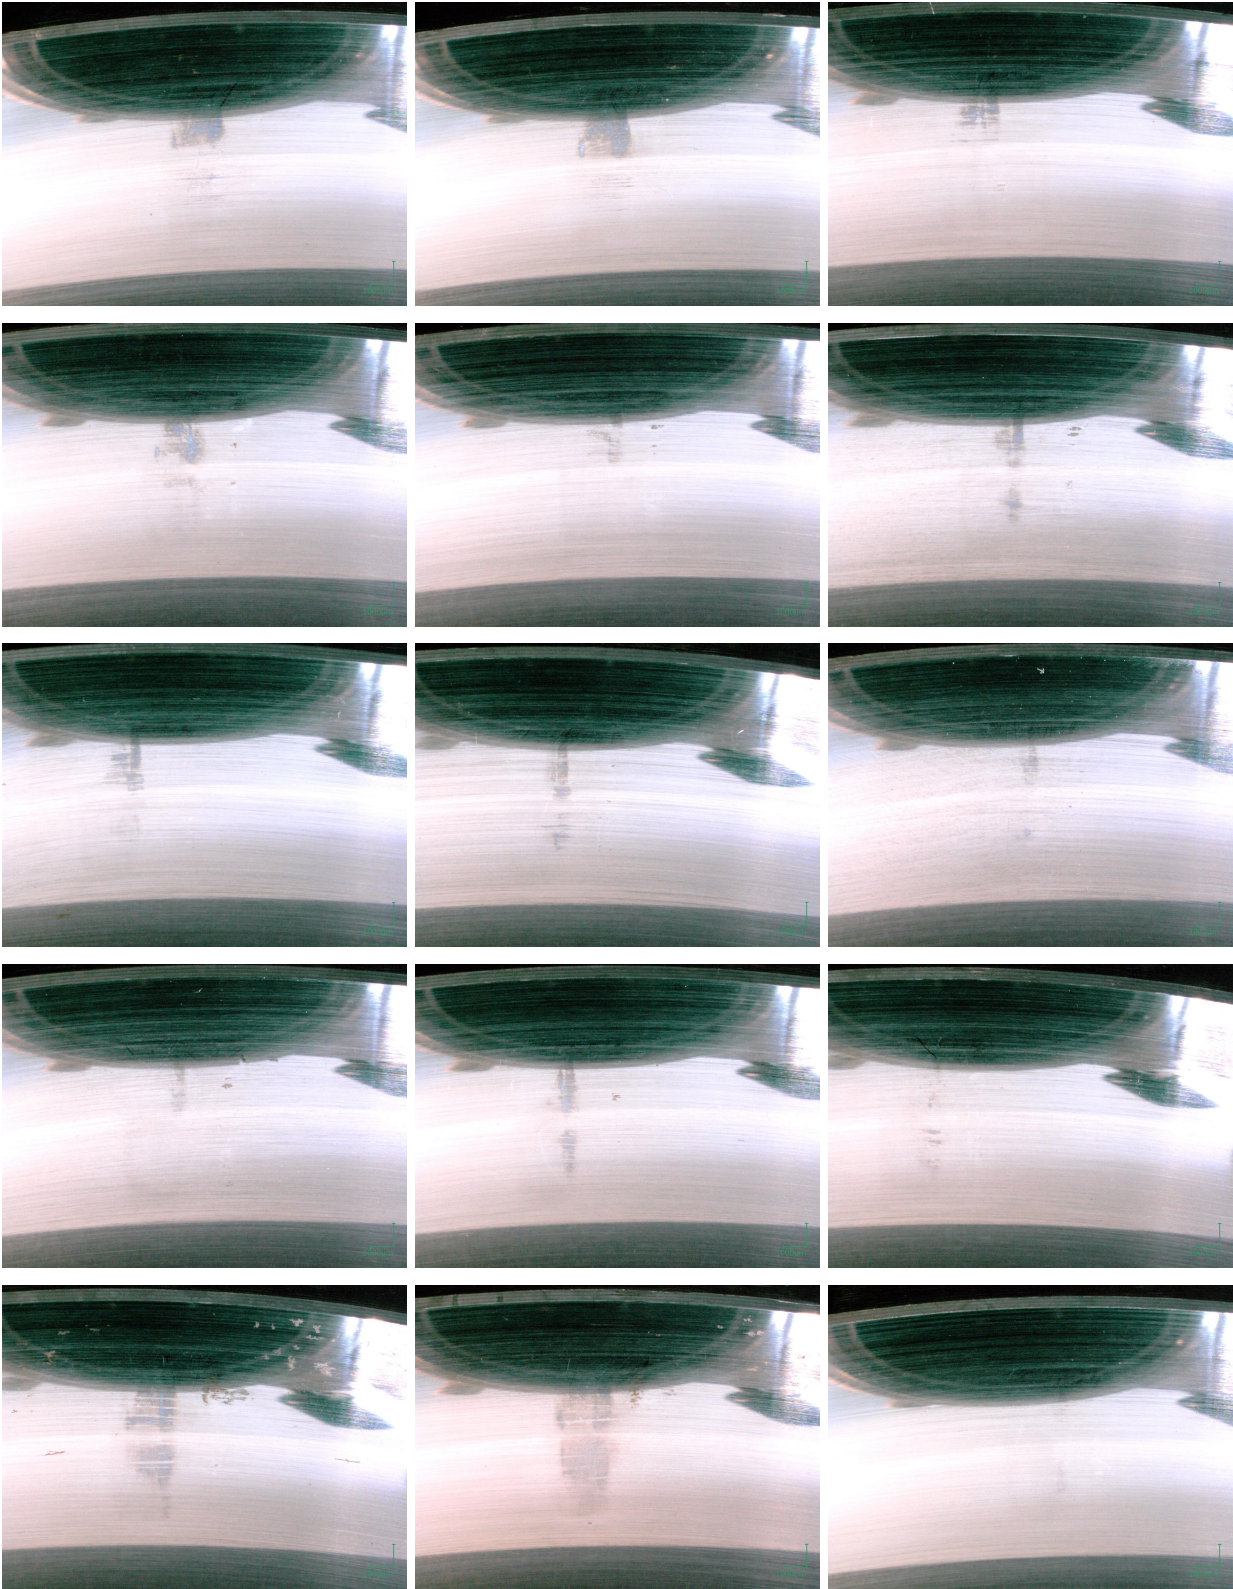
Raceway condition inner ring, Test ID 7, Bearing ID 0023
